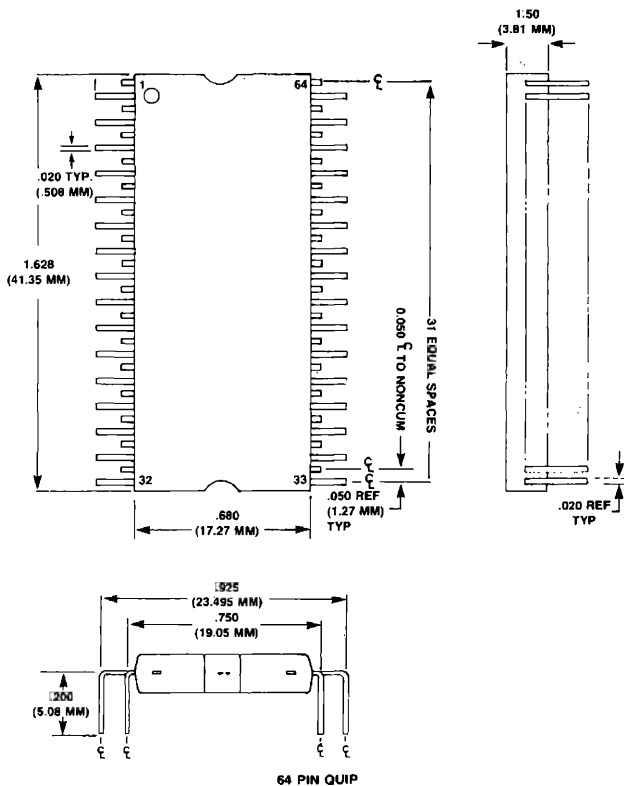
64 PIN QUIP Dimensional Outline
